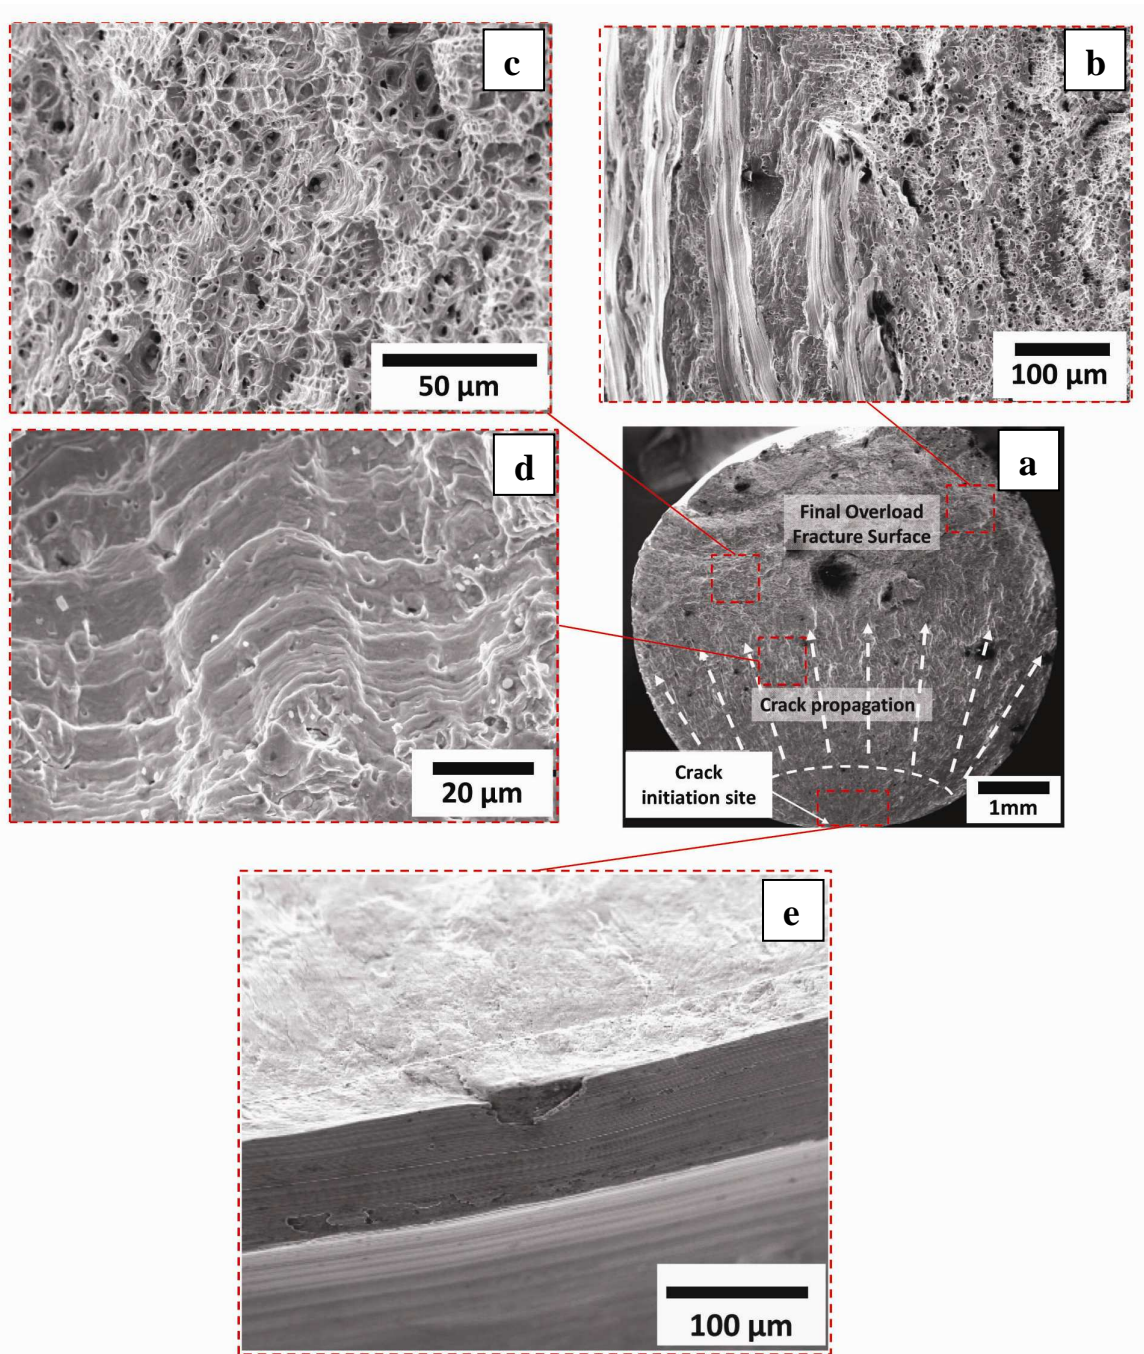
21: a) Fracture surfaces of AISI 304L, fine machined (1) and fatigue tested at 330 MPa; b) Final fast fracture region; c) Dimples; d) striations; e) Crack origin.
